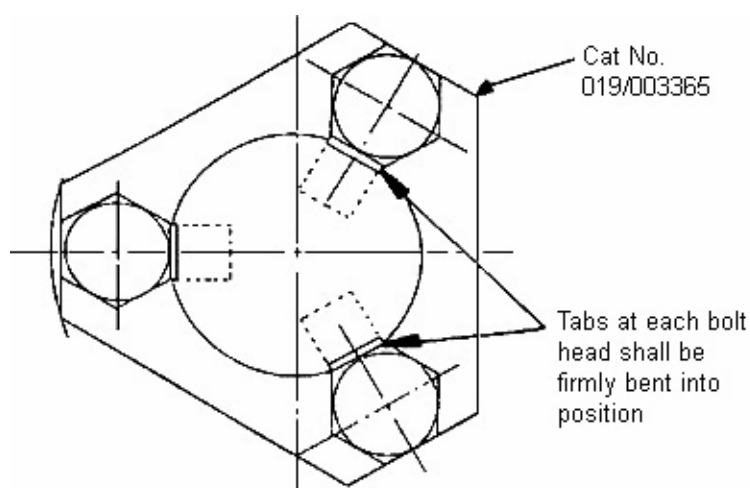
Method of Fitting Locking Plates to Axle Ends with BR WSP and Plain End Caps
